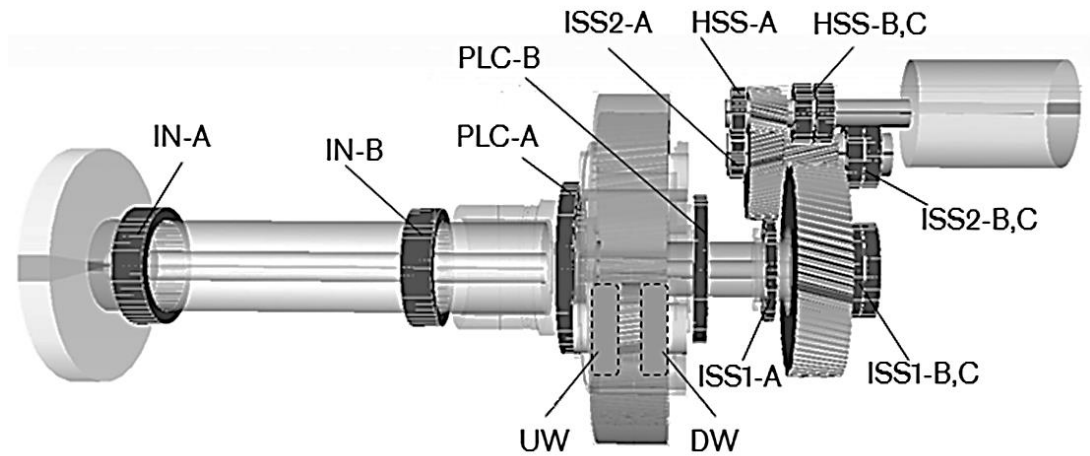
Roller bearings locations in the wind turbine drivetrain and nomenclature used
